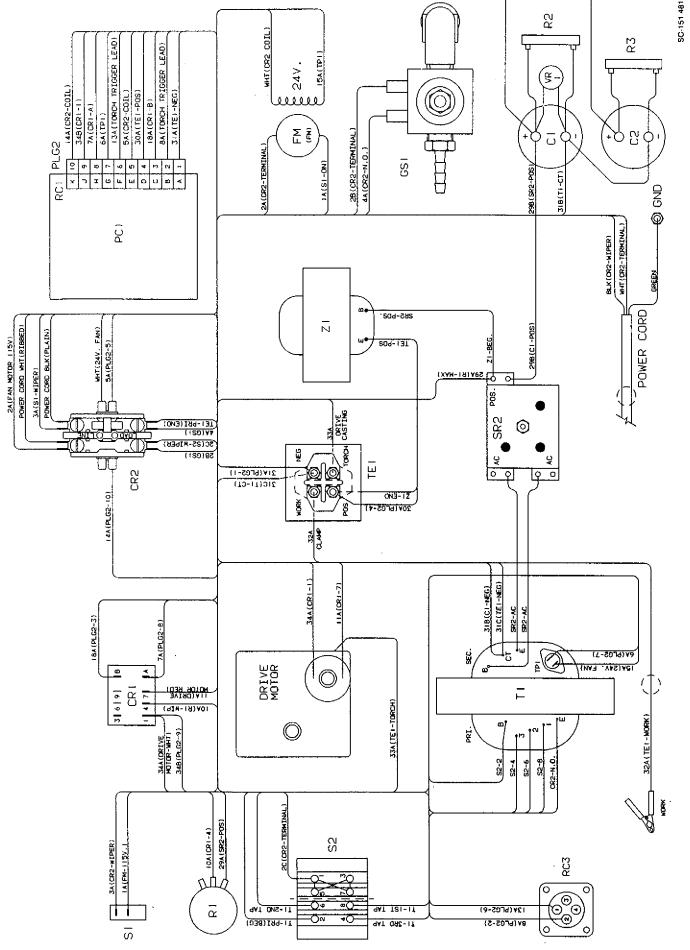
Wiring Diagram For Welding Power Source
